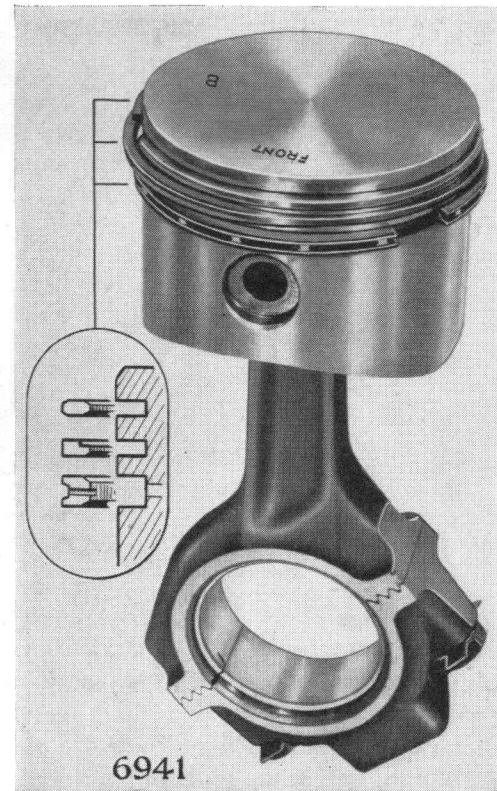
Piston rings and piston and connecting rod correctly assembled
